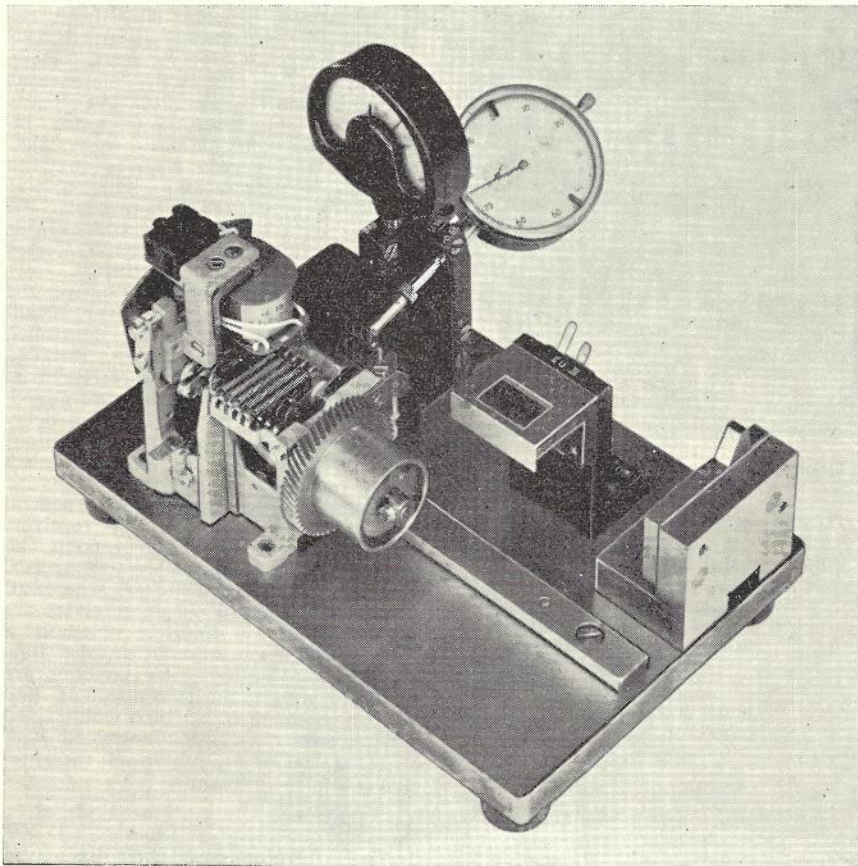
Fixture for Testing Final Positions of Swords in a Receiver Which Are Later to Engage into the Printer Code-Bars.
